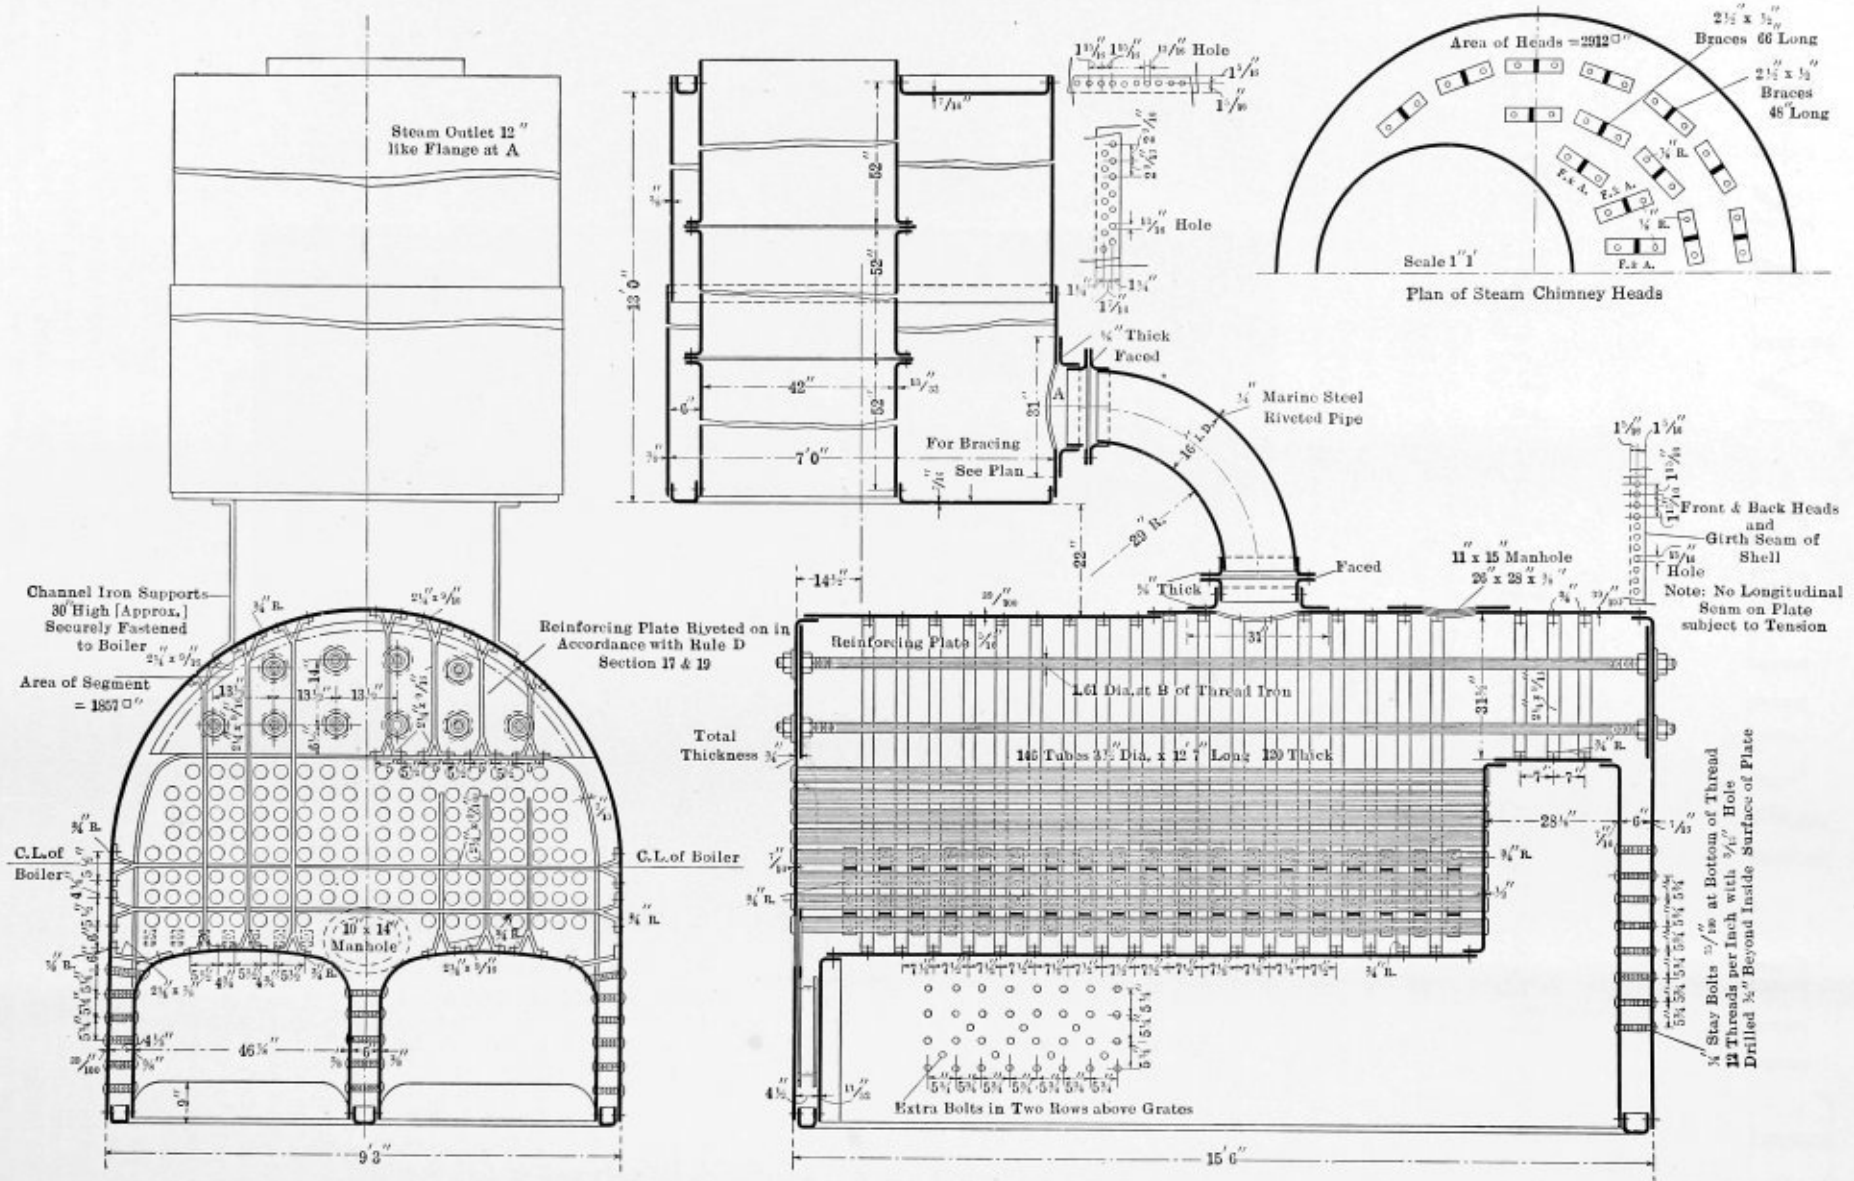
Detail Plans of Dog House Boiler Built by the Kingsford Foundry & Machine Works for the Steamer *Apollo
